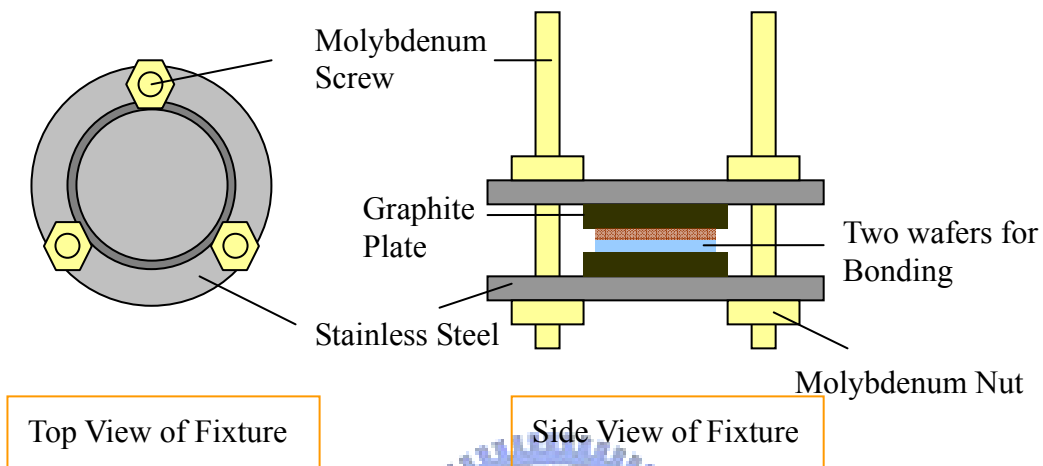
The scheme of top view and the side view of wafer bonding fixture. A stuck wafer was clipped on the wafer bonding fixture.
